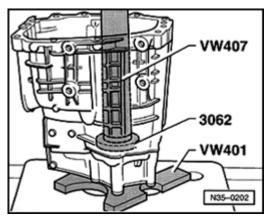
Pulling out bushing securing tapered roller bearing outer race
